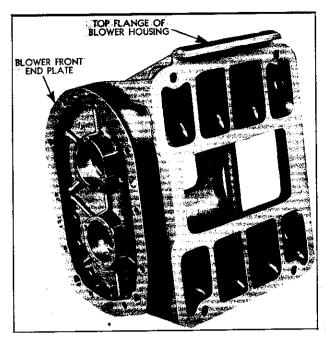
Position of Blower Front End Plate for Engine Models RC, RD, LC, and LD.
